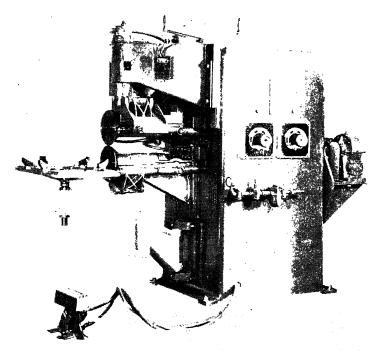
Seam welder—swinging table to hold automobile gas tanks during welding. (*Thomson-Gibb.*)
